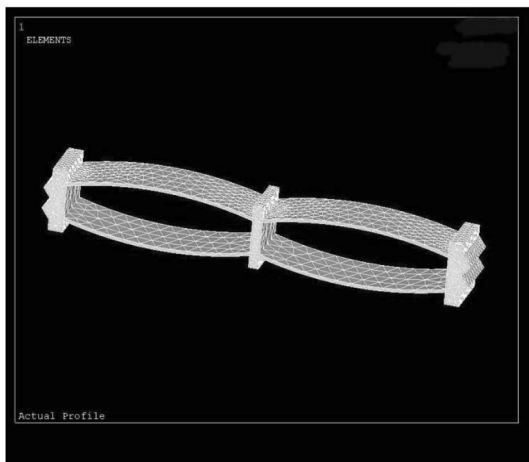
Actual shape of MEMS socket pin suggested by the socket manufacturer
